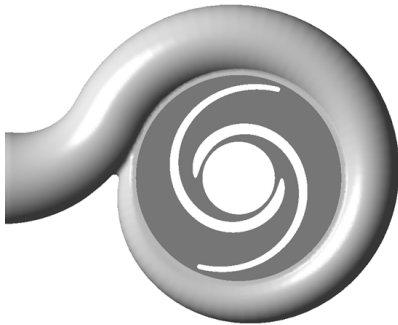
Three-dimensional 2 vane pump impeller and volute
